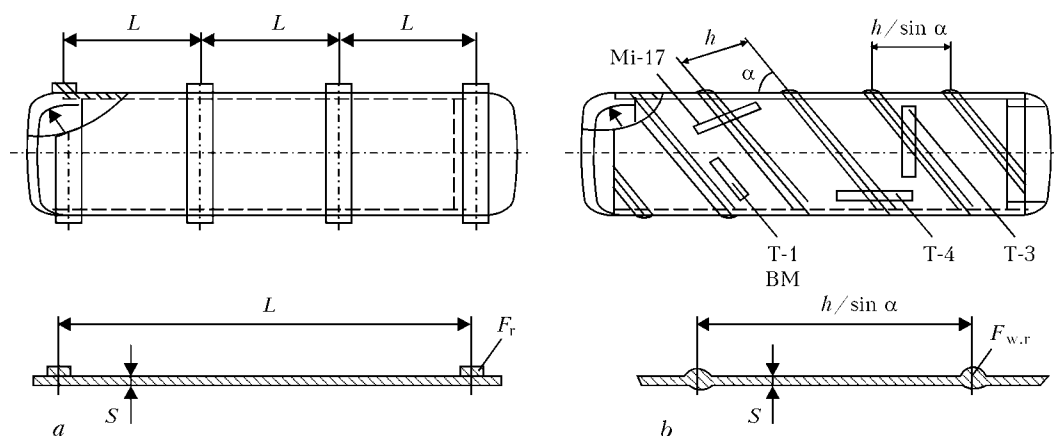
Scheme of cutting out of samples: *a* — hull from thin-wall pipe and with thread rings; *b* — same, but from SWP; T-1 — samples from base metal; Mi-17 — samples of welded joint with classical positioning of weld; T-4 — samples Mi-18 with oblique-like welded joint cut out along generant of SWP; T-3 — samples Mi-18 (special) with oblique-like welded joint cut out along radial surface of SWP; F_r , $F_{w,r}$ — area of thread ring and weld reinforcement, respectively
